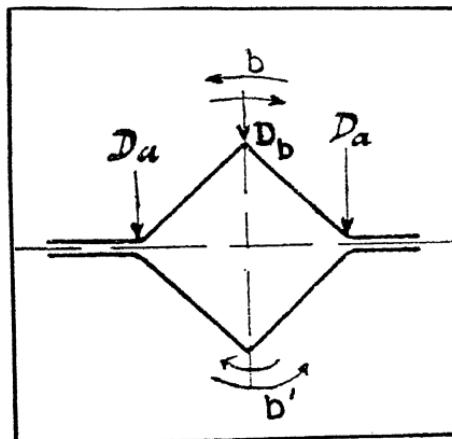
Large Working Diameters Throw the Surface Parts Ahead
